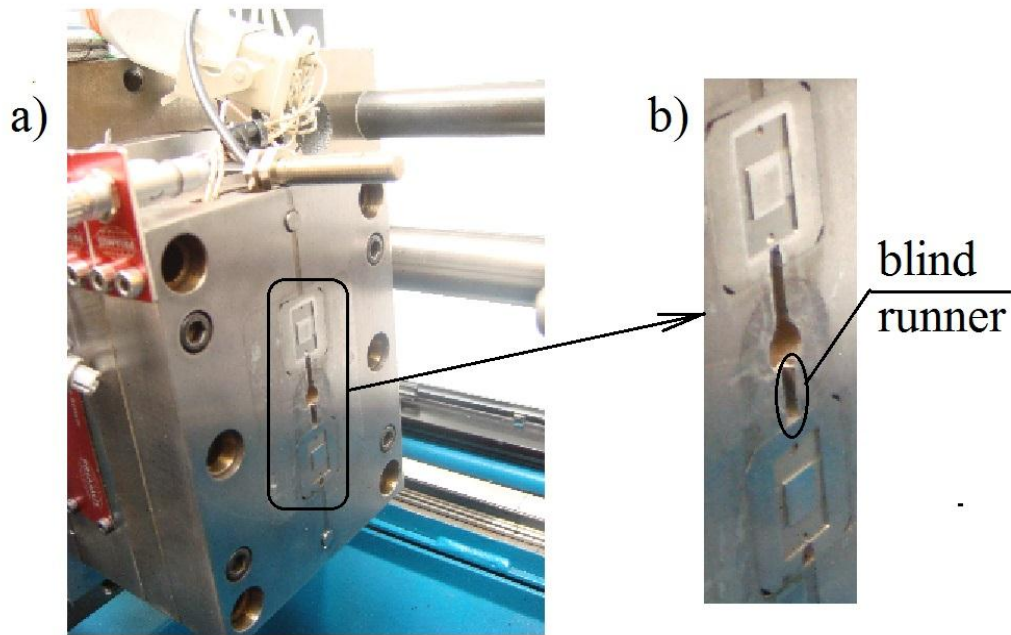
a) Ejection side of the mould. b) Assembled moulding inserts
